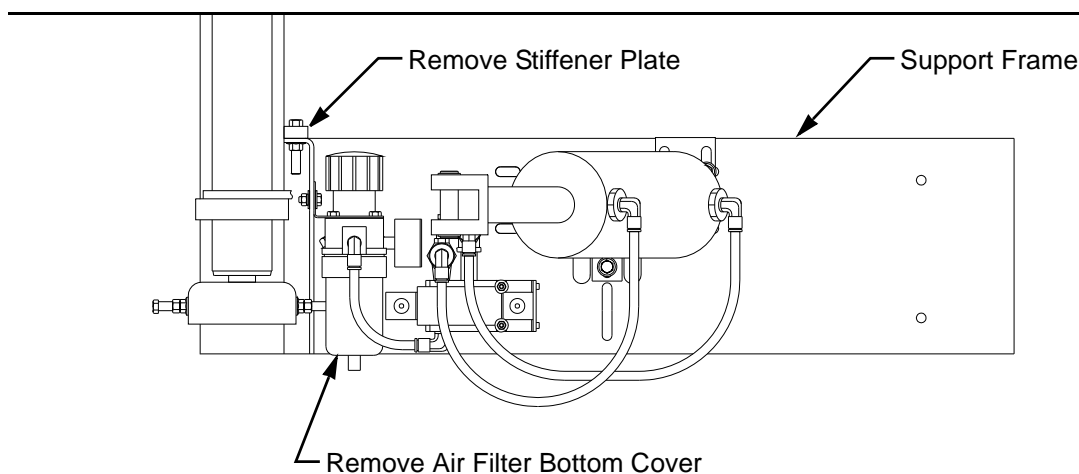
Removing the Air Filter Bottom Cover and Stiffener Plate
